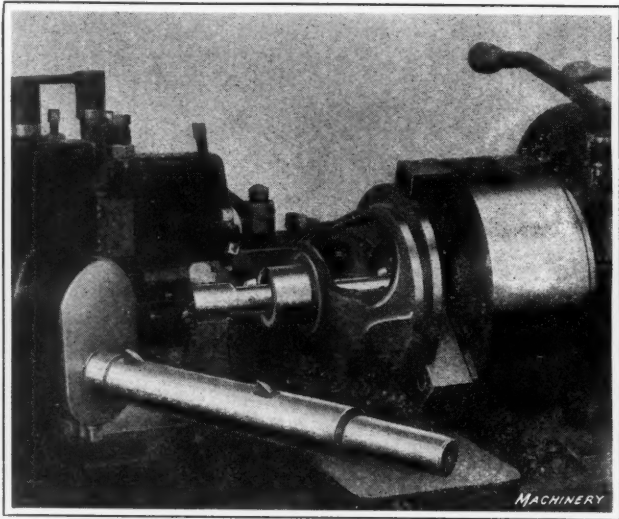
Rear of Machine illustrated in Fig. 18, showing a Close View of the Work
